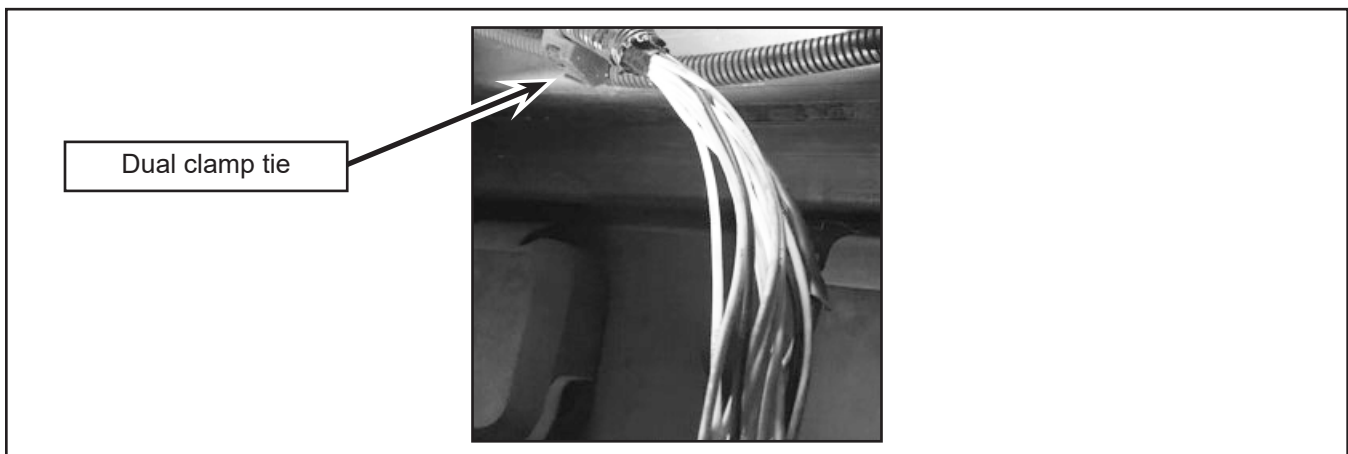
View of the Cut Section of WHA 64 Removed from the Convoluted Tubing
